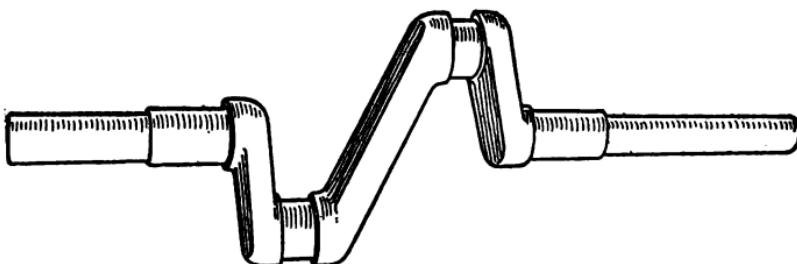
A two-cylinder crank-shaft with throws at 180°. This form of shaft is used on opposed cylinder four-cycle engines, or on parallel (twin) cylinder 2-cycle engines.
